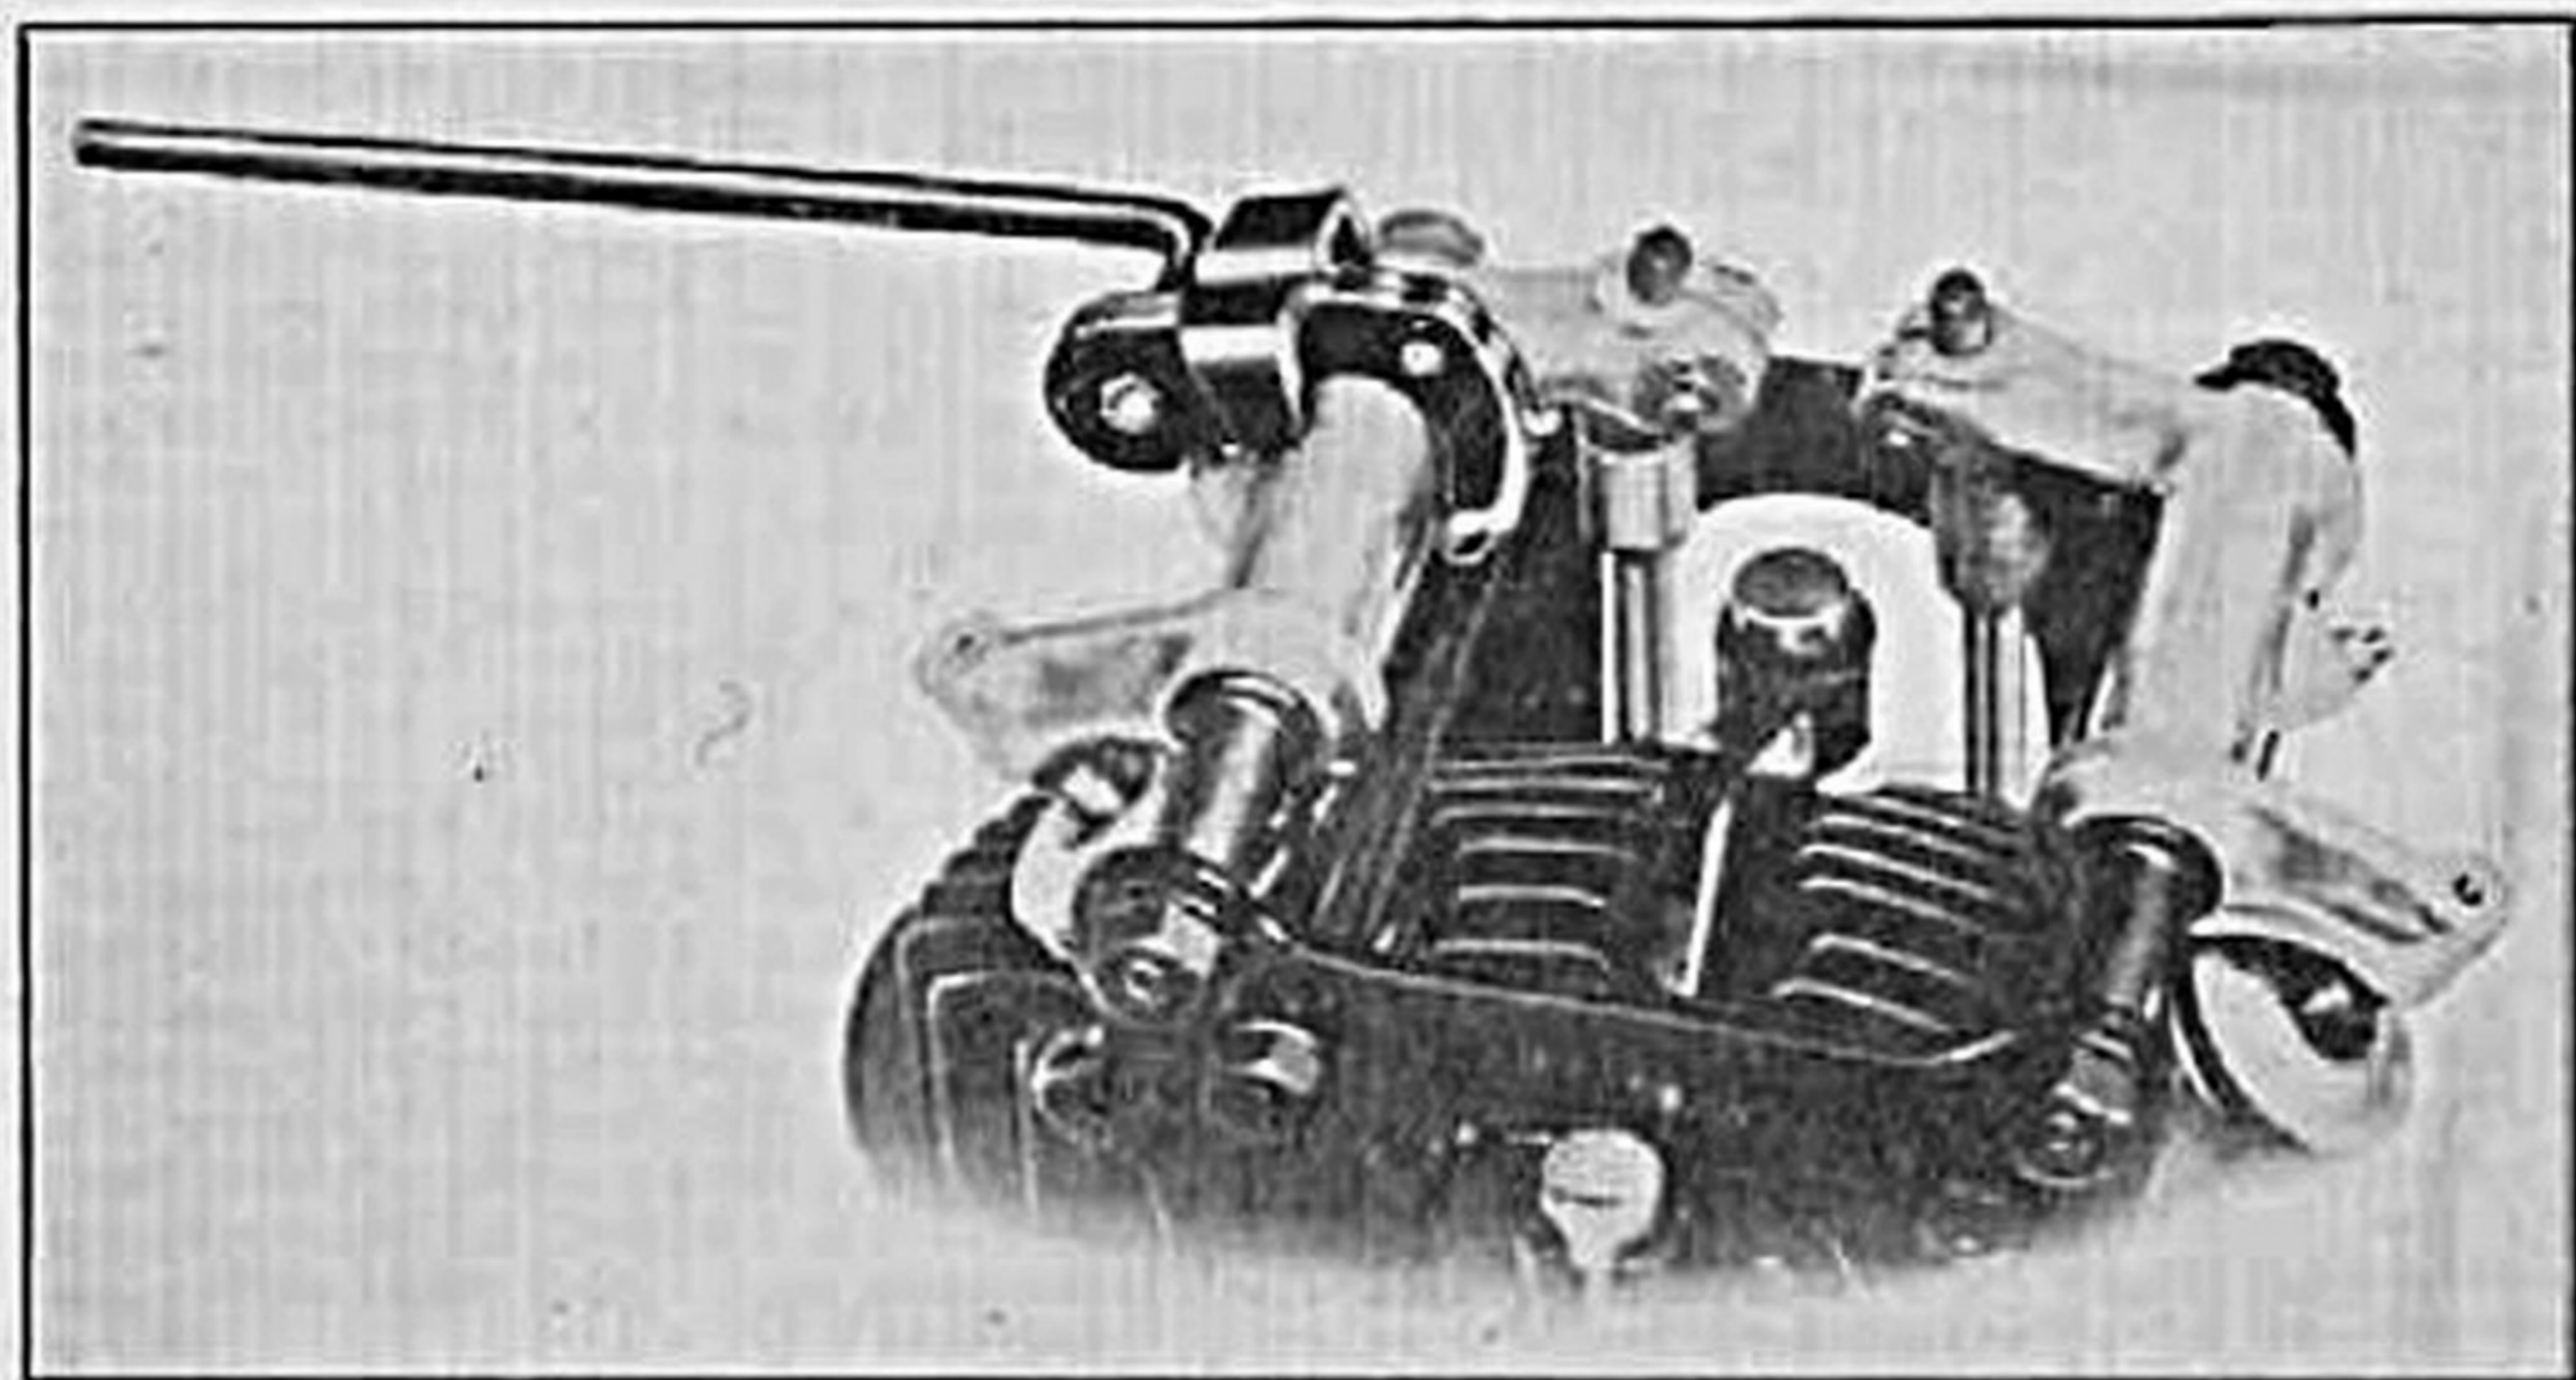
THE A.J.S. TAPPET TUBE EXTRACTOR
